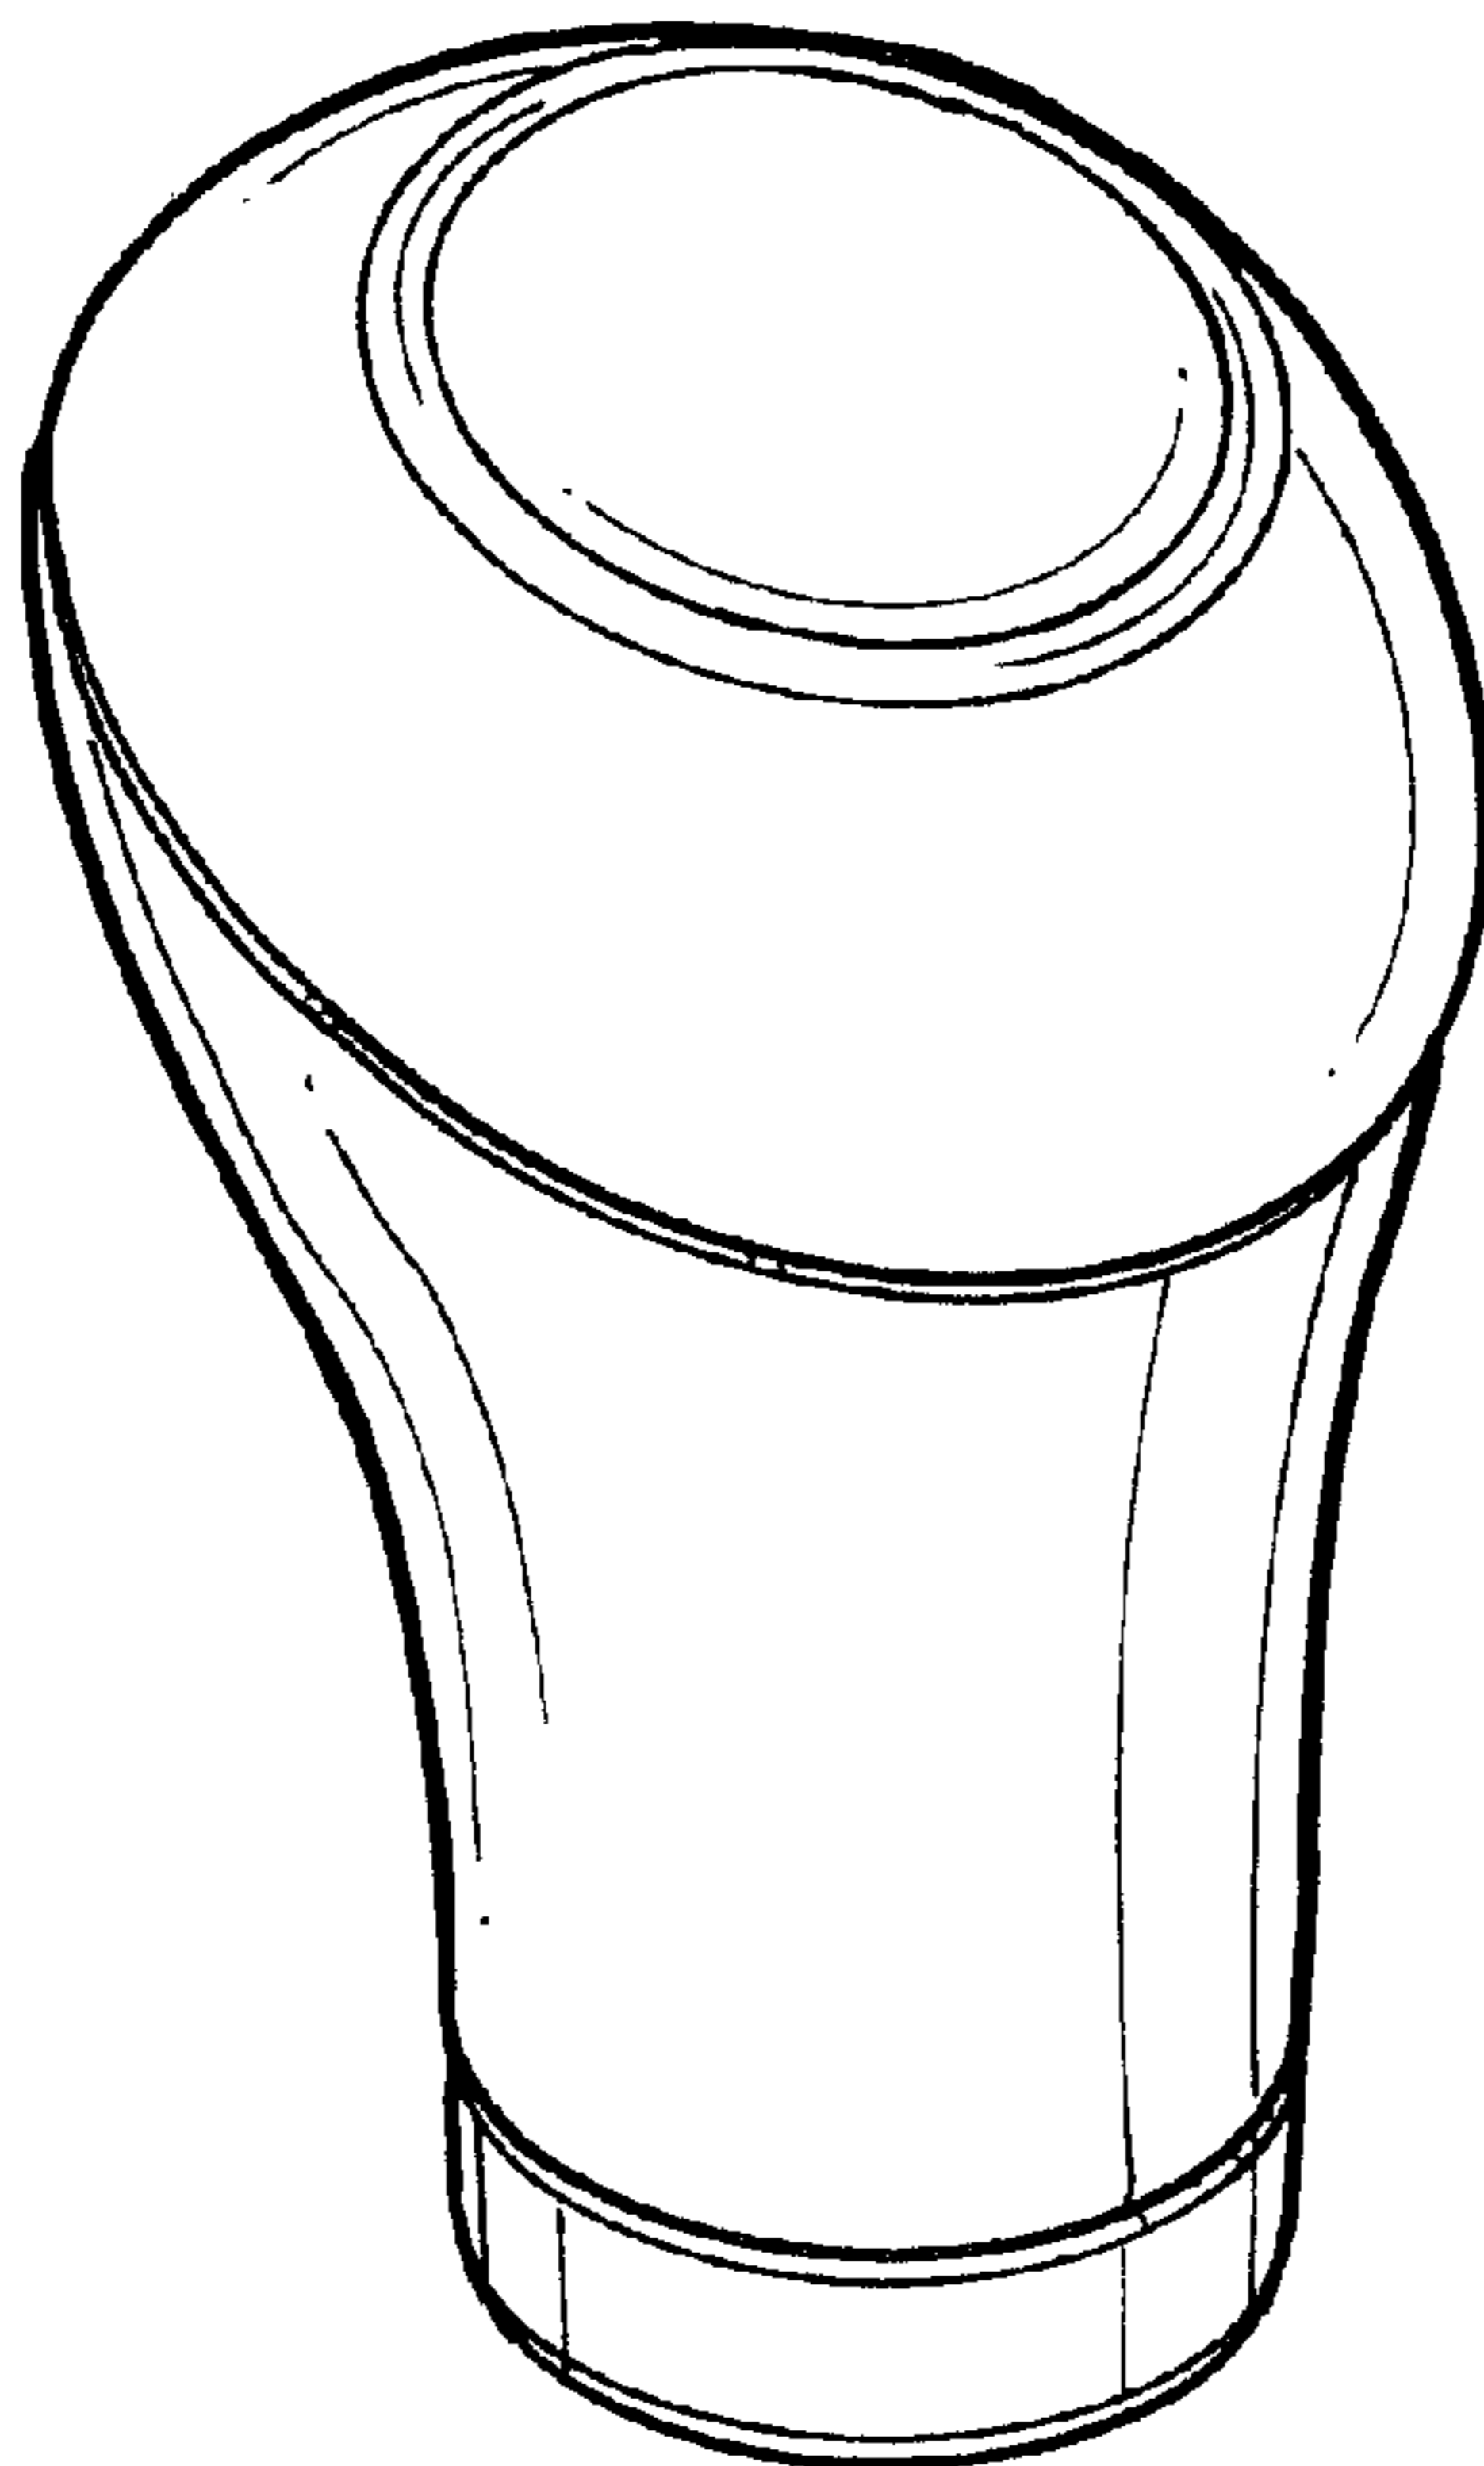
is a left side view of the surface configuration of a gearshift knob for a vehicle according to our novel design, the right side view being mirror symmetrical;
